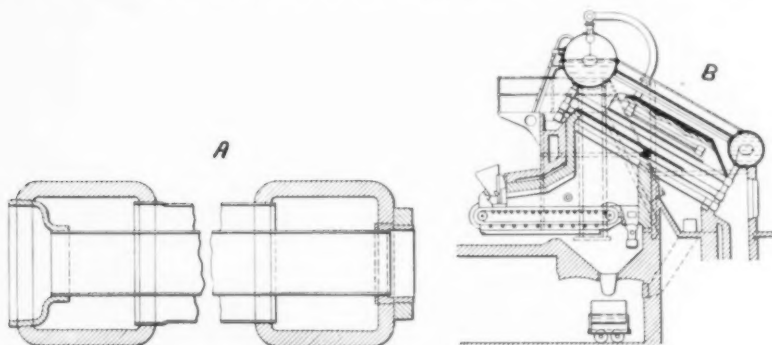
GLOGNER WATER TUBE BOILER AND BOILER TUBE
